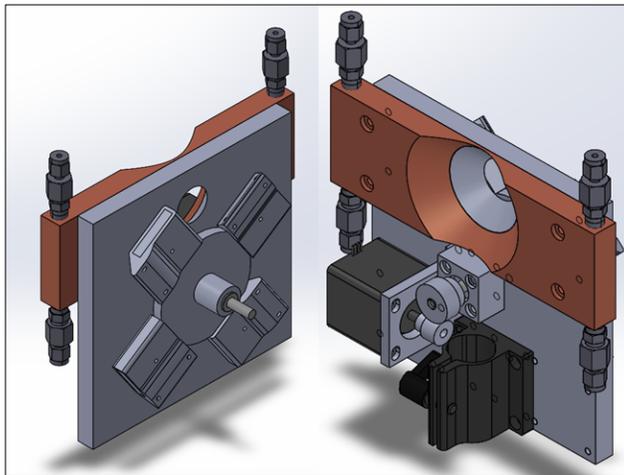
CAD rendering of a prototype renewable plasma mirror inserter that is capable of operating at > 4 PW. Left: Front view side with laser incident on hole over which four wipers spread a thin film of liquid crystal. Right: Rear view: motor and gear train that drives wipers, plus heat sink (orange) that temperature controls LC film properties.
